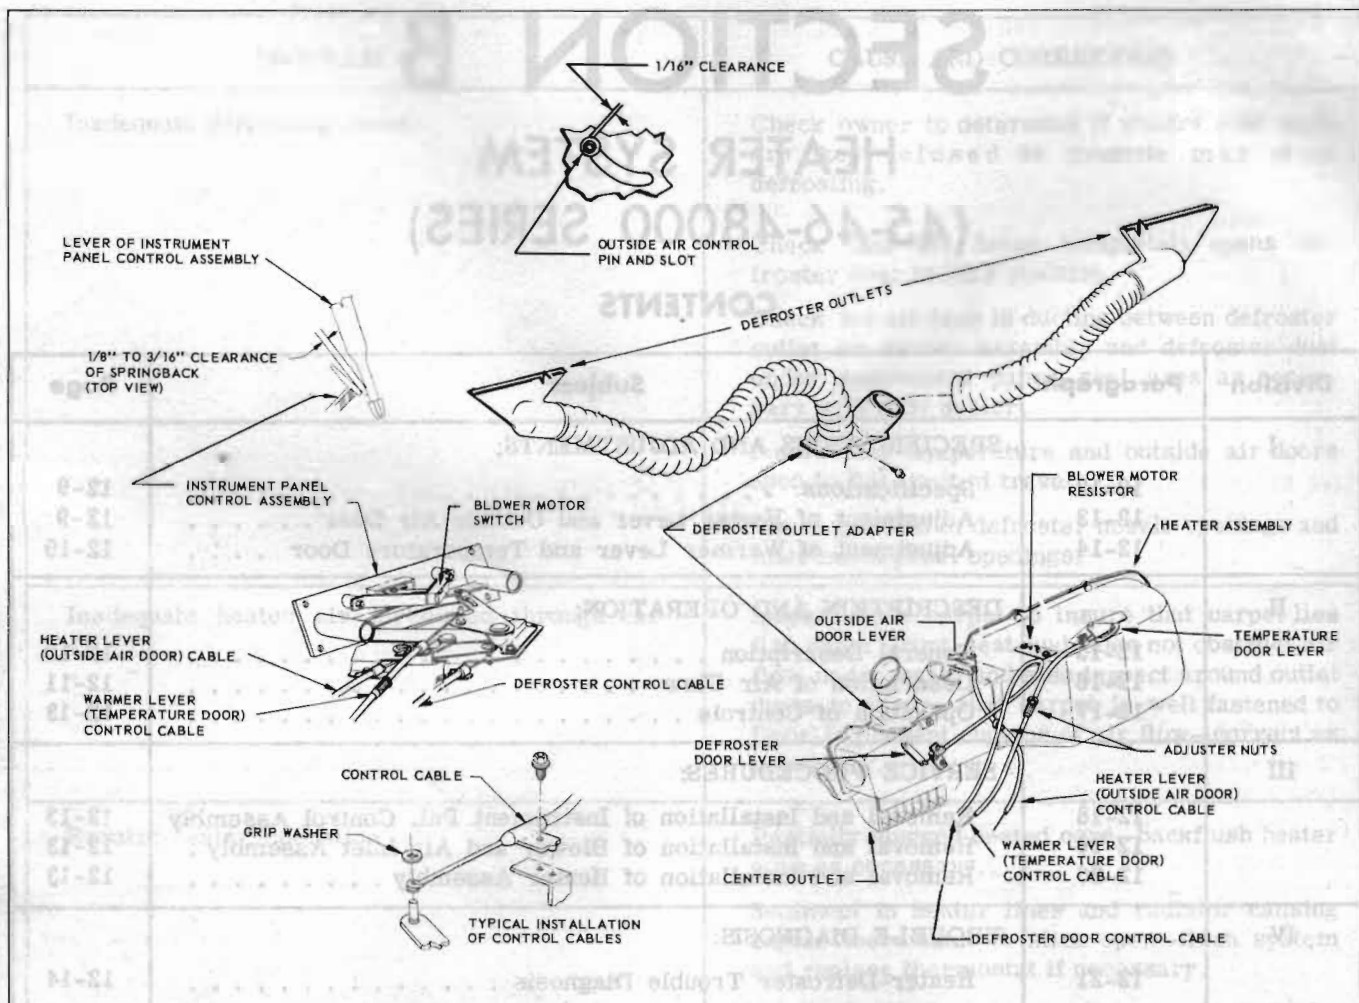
Heater and Instrument Panel Control Assembly Installation (45000, 46000 and 48000 Series)
